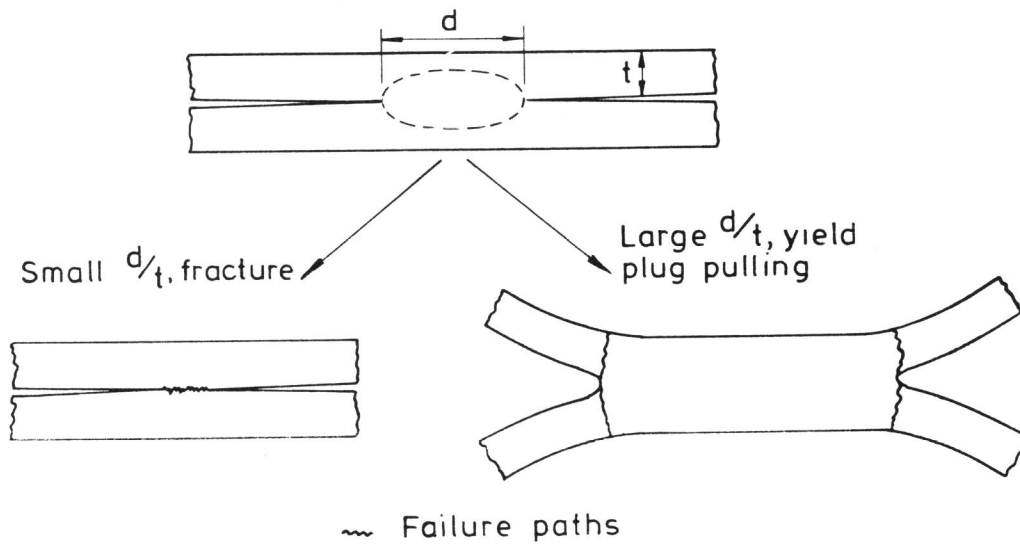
Fracture and yielding types of spot weld failure
